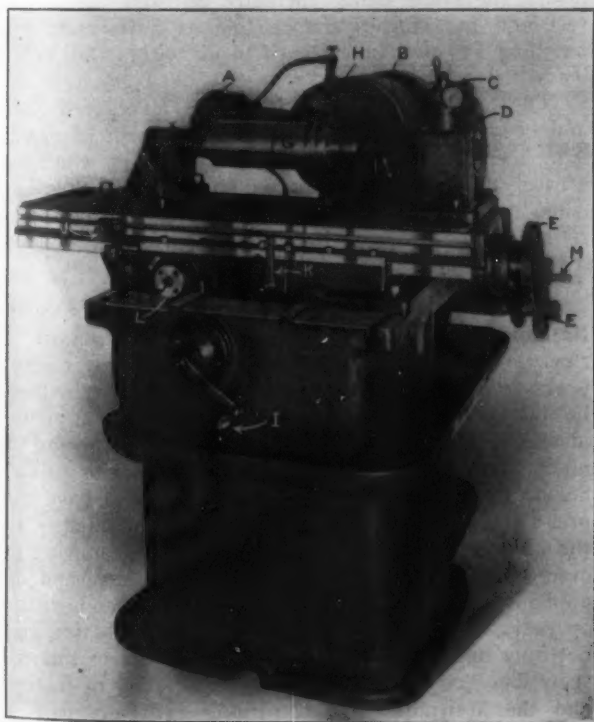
Front View of a Large Automatic Thread Miller Built by Schuchardt & Schütte, New York City.
